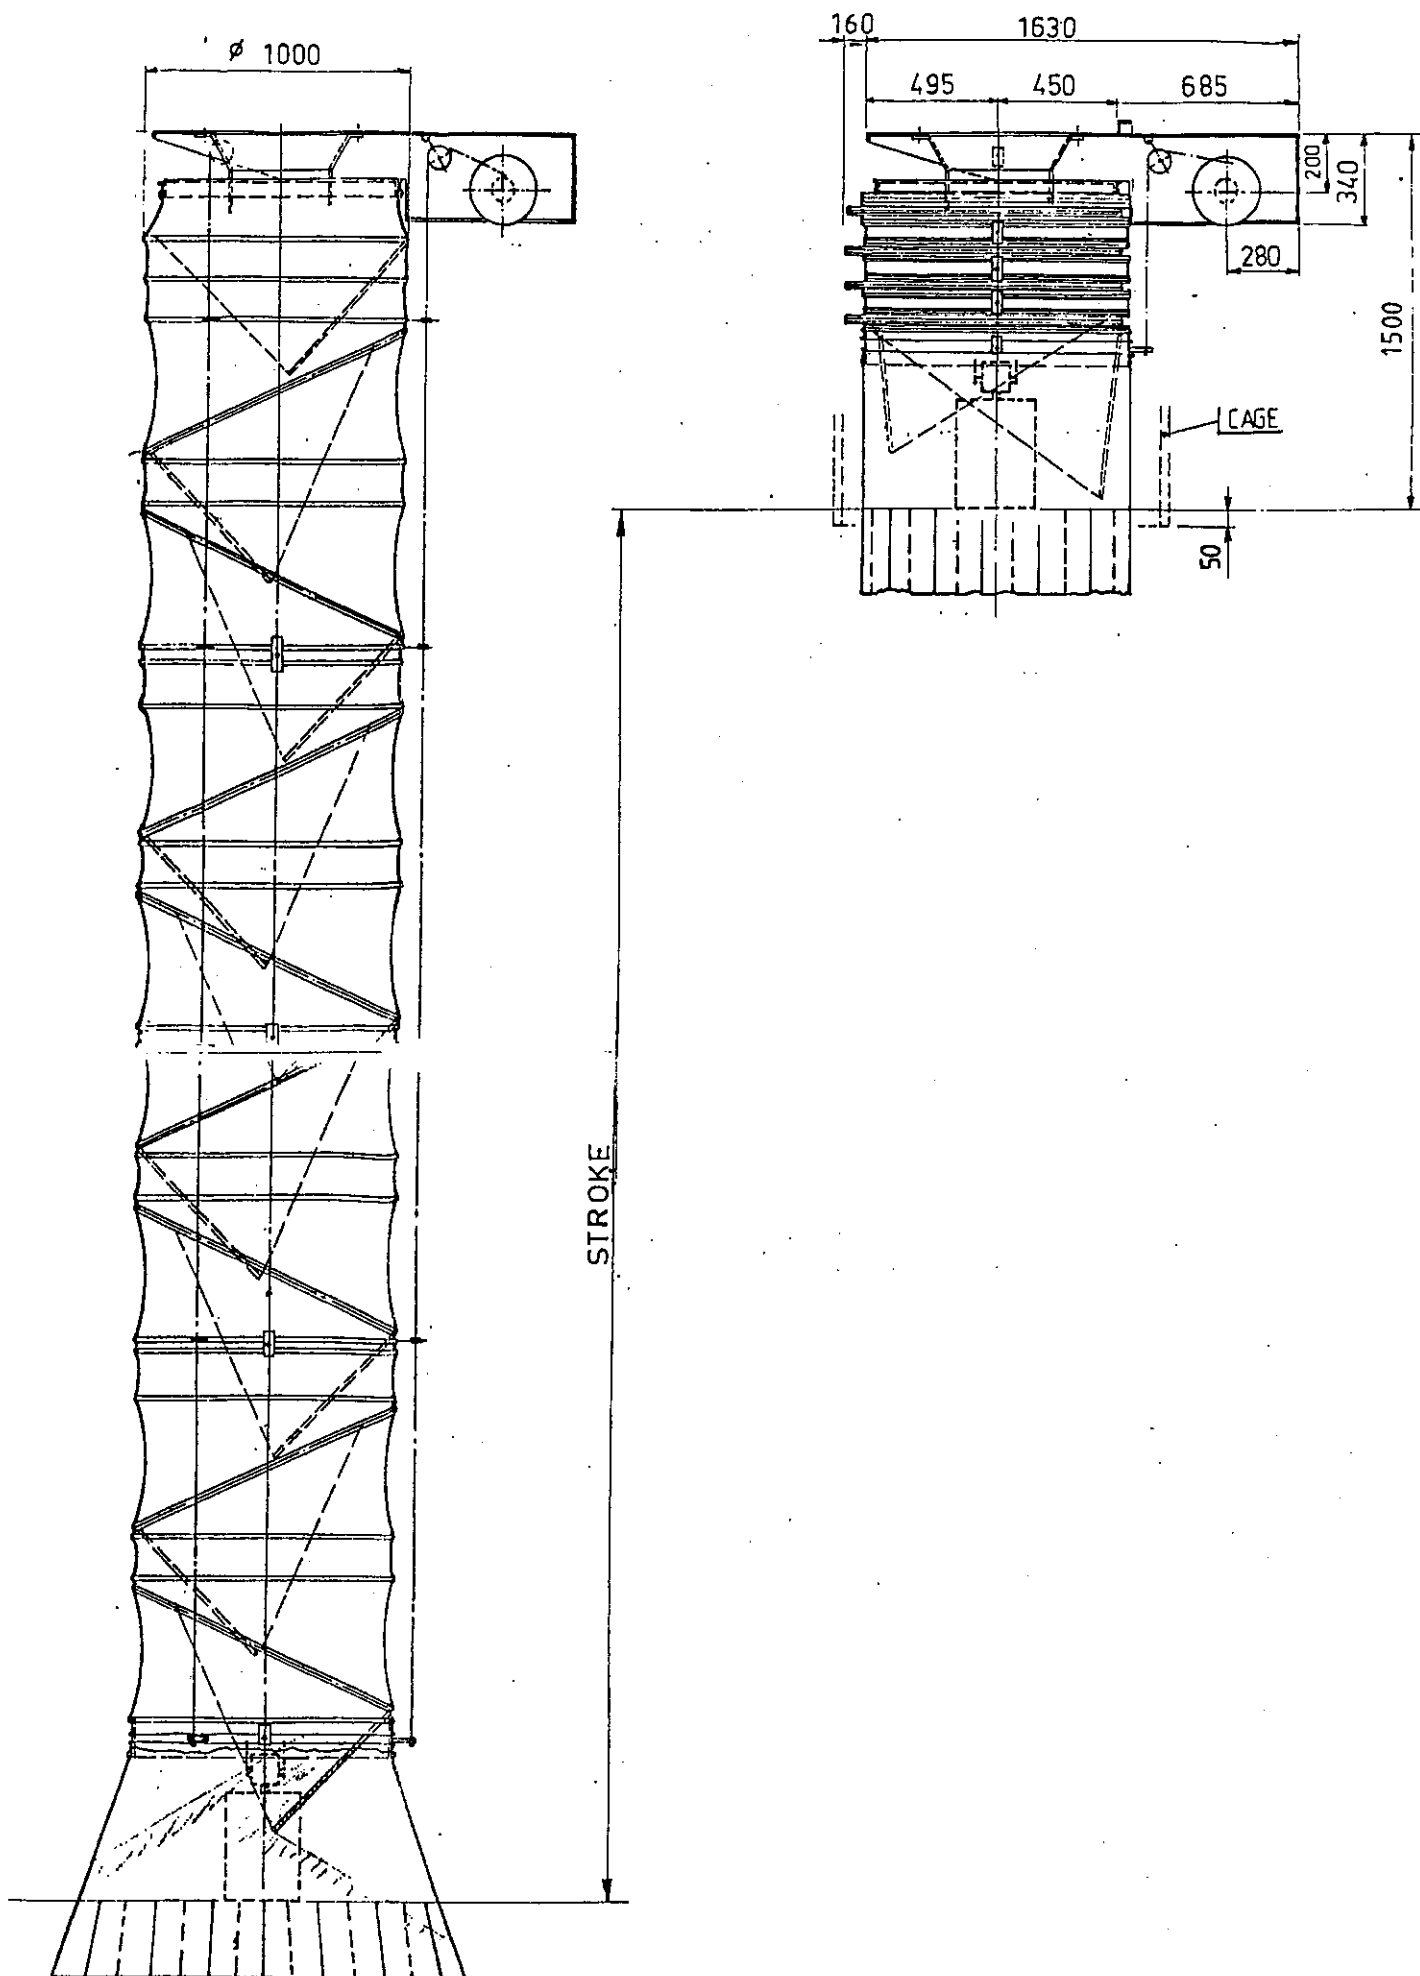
B - Typical Telescopic Chute with Ladder Arrangement
